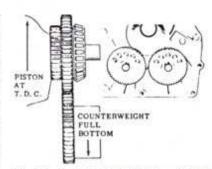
On Models HH80, HH100 and HH120, balancer gears are correctly timed to crankshaft when piston is at TDC and weights are at full bottom position.
